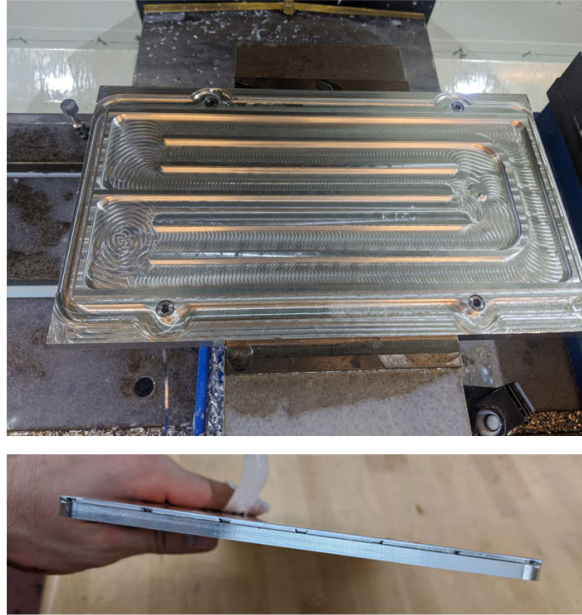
Machining and assembly of the cold plate with a good fit of the dovetails.
